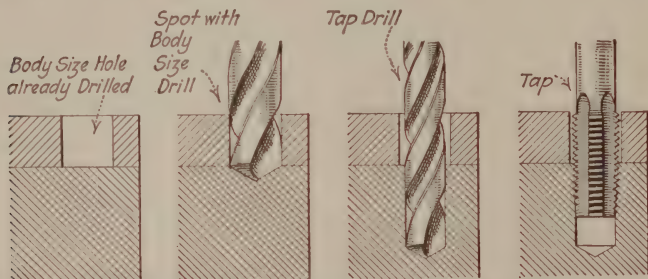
Spotting and drilling for tap. In order to tighten the top piece to the other, the screw will go through the top piece (*body-size drill*) and screw into the bottom piece after this piece has been *spotted* with the body-size drill, drilled with the *tap drill* (a given amount smaller than the body size) and then tapped.
